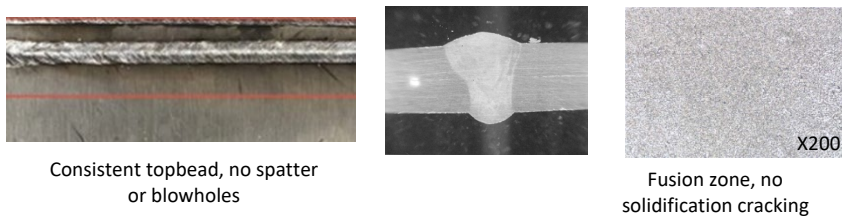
2mm thick 6061 T6 aluminium based alloy, butt joint, 3m/min, 1.5kW+2.5kW
